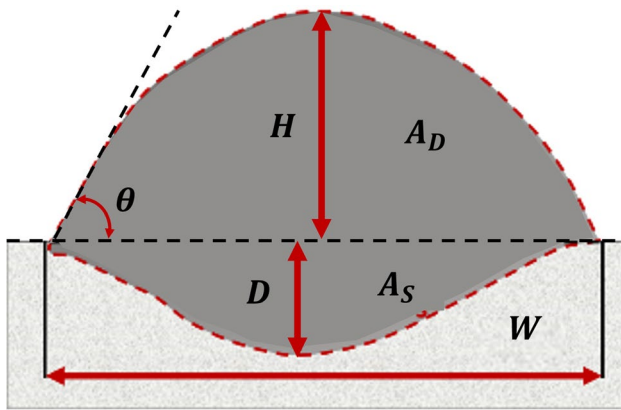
Measurements of a weld bead profile, adapted from [18]
